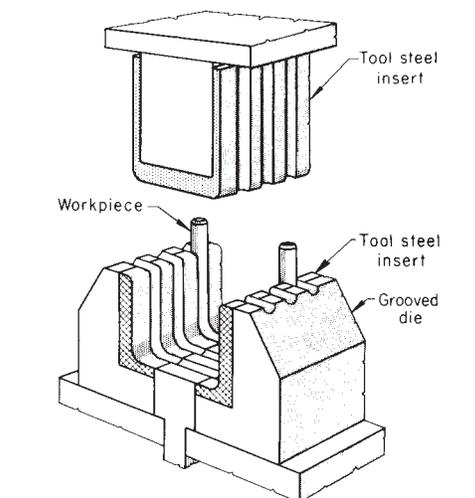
Use of a grooved die in a mechanical press for bending a rod into a U-bolt in one stroke
